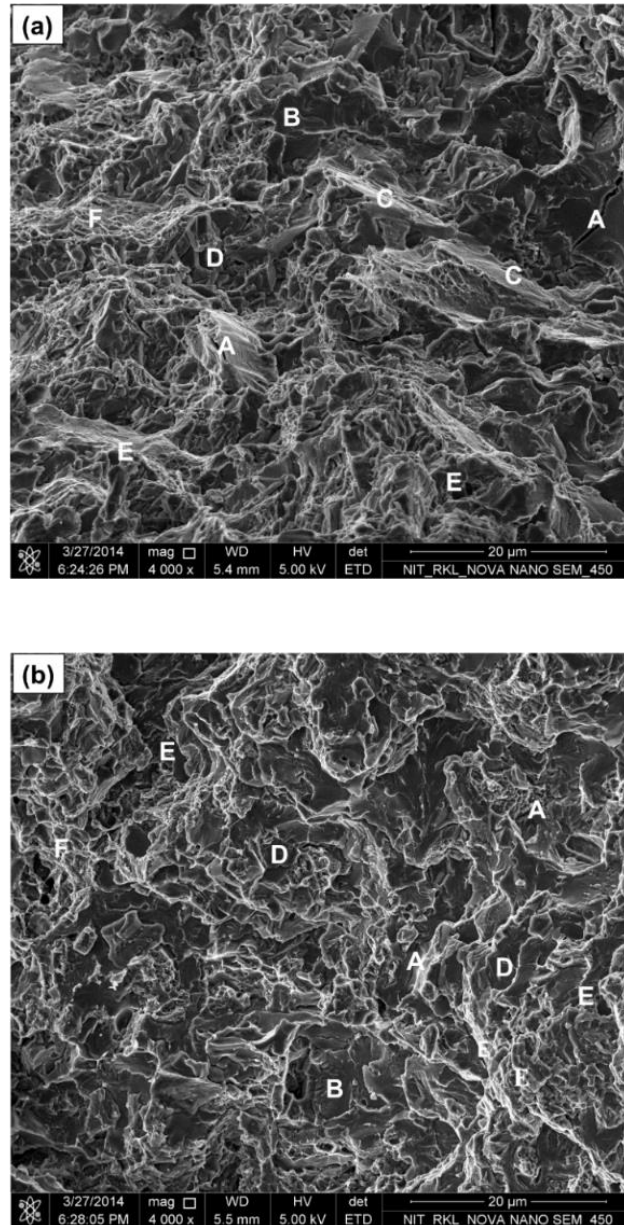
Fracture surfaces of the broken tensile specimens of the squeeze-cast AZXY9110 alloy tested at (a) ambient and (b) 473 K temperatures.
